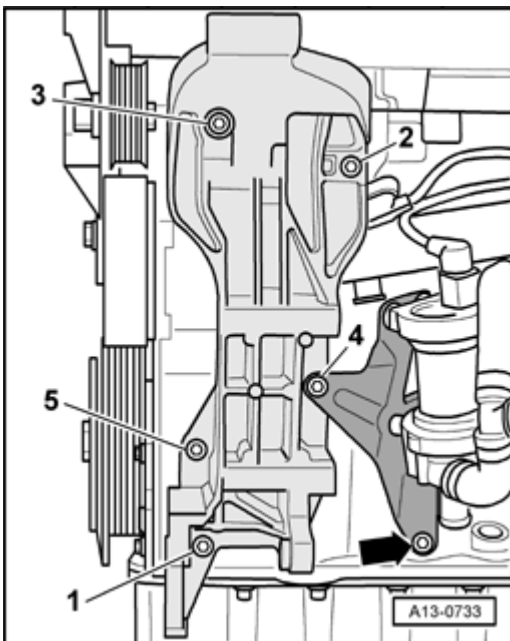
Removing Bolt At Bracket For After-Run Coolant Pump -V51-
